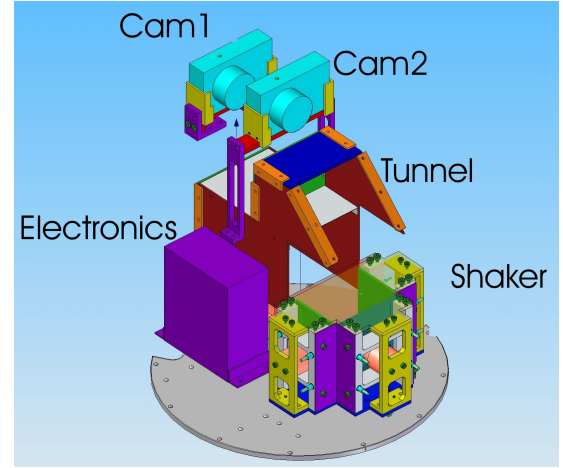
Exploded drawing of the GAGa setup. The main parts are the shaker, an optical tunnel, two mounted cameras and one box for the electronics.
